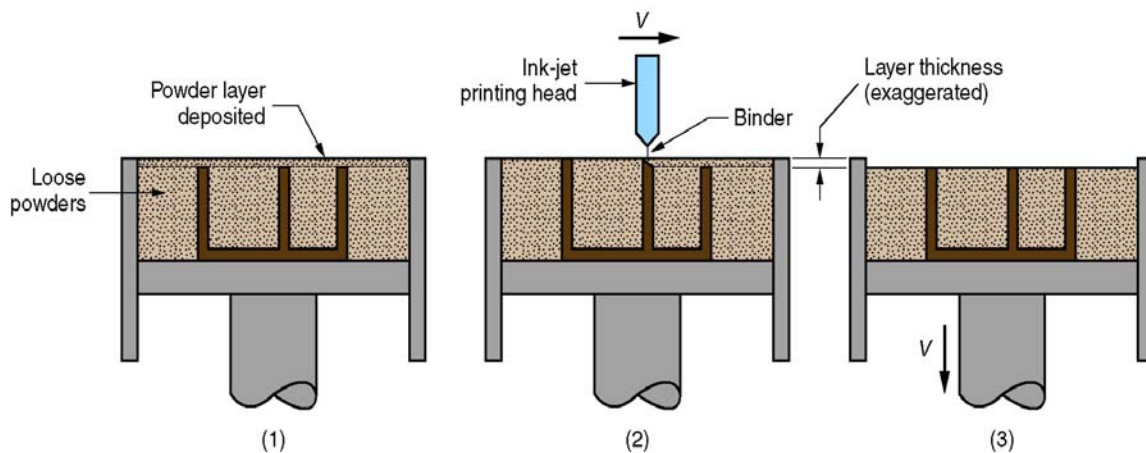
Three dimensional printing: (1) powder layer is deposited, (2) ink-jet printing of areas that will become the part, and (3) piston is lowered for next layer (key: v = motion) [38].
